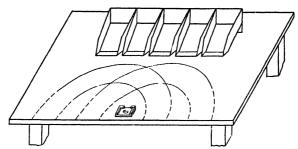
Incorrect work place layout. Bins are located too far from the assembly fixture. The operator must bend forward to get parts from bins.
